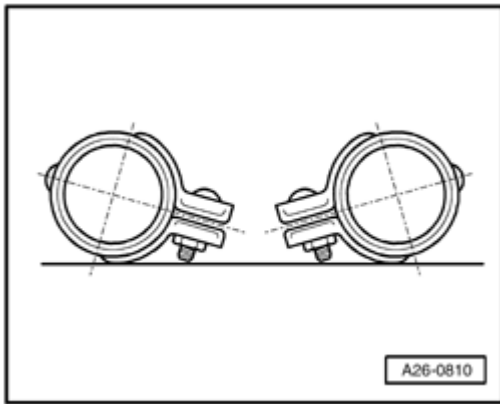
Adjusting Rear Double Clamps So That Bolt Ends Do Not Project Over Lower Edges Of Double Clamps
